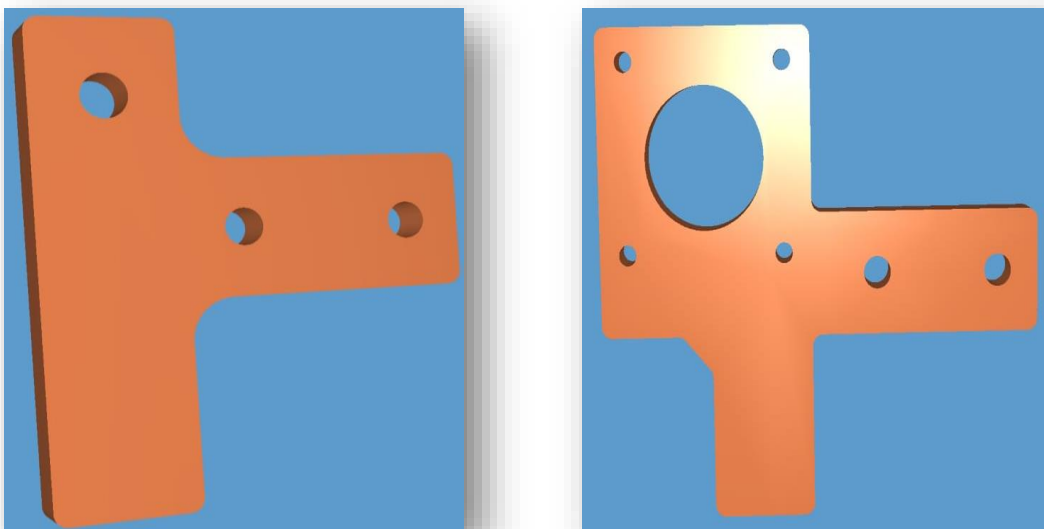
CADD diagrams of 3D Printed parts used in making of Two – Axis Computer Numerical Controlled Foam Cutting Machine
